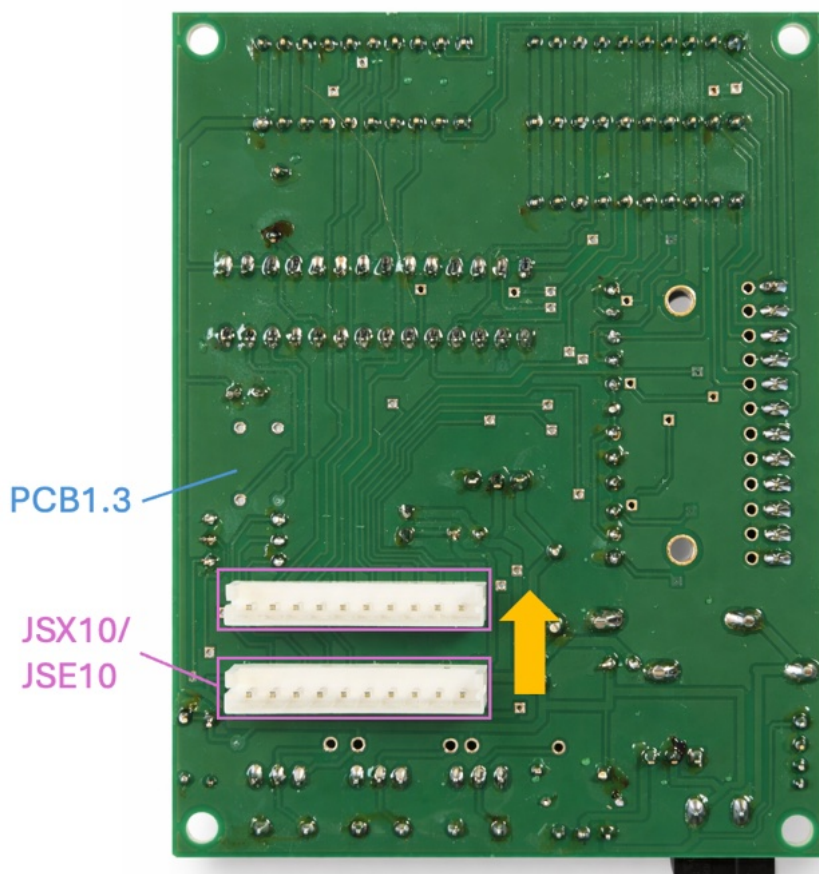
Mainboard PCB1.3 (V3.0) Step 3.
